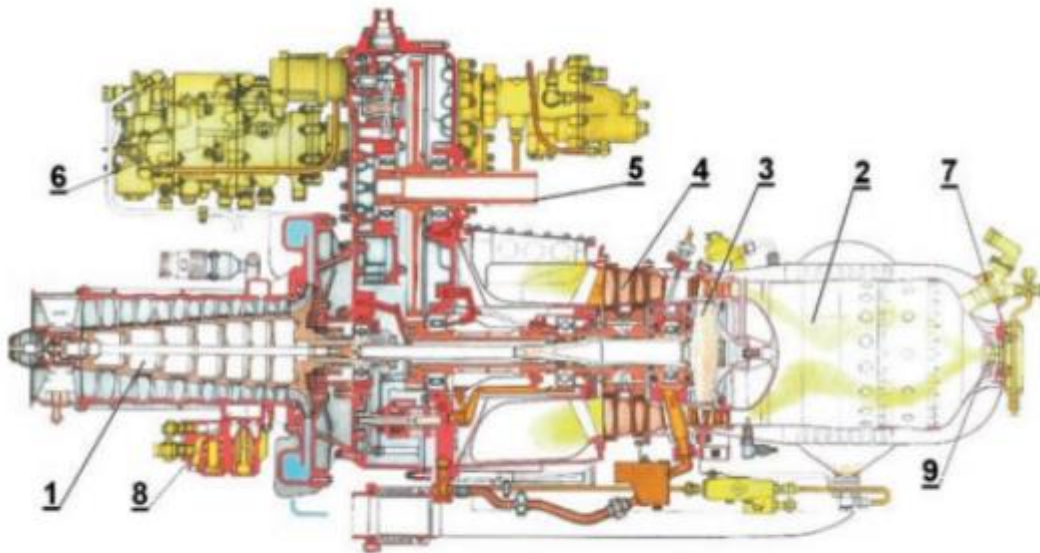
Schematic diagram of the GTD-350 gas turbine engine. 1 compressor, 2 combustion chamber, 3 compressor turbine, 4 power turbine, 5 power shaft, 6 pump-regulator, 7 ignition device, 8 air bleeding valve, 9 main injector
